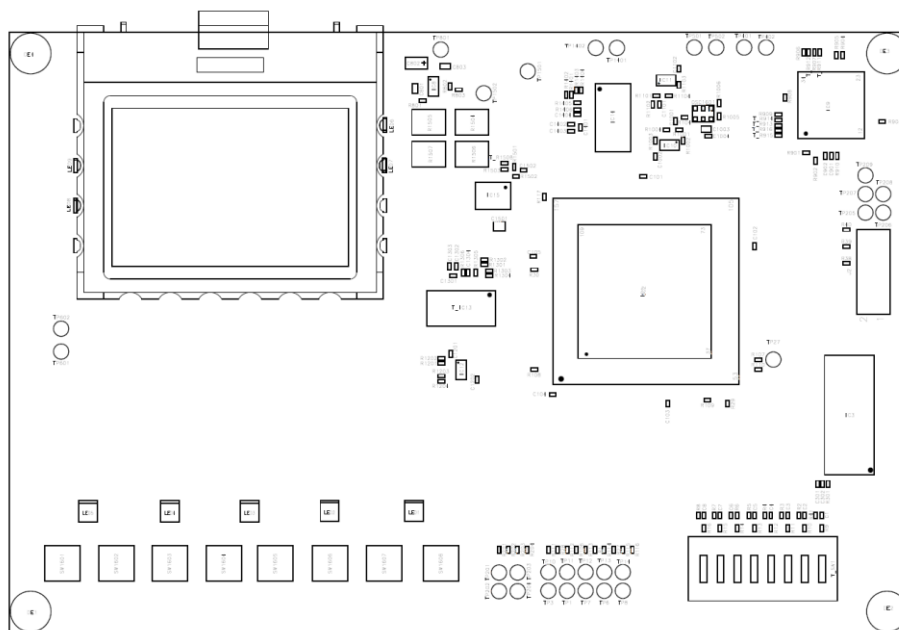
Mechanic Drawings of SMPS Transformer Test Device, top side
